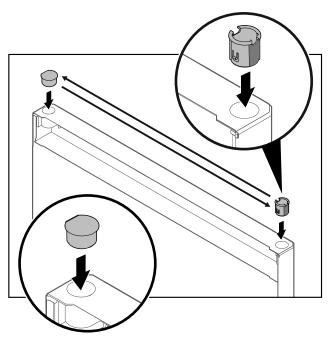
Insert hinge bushing and cover plug on the opposite side (the flattened sides face outwards). ►
